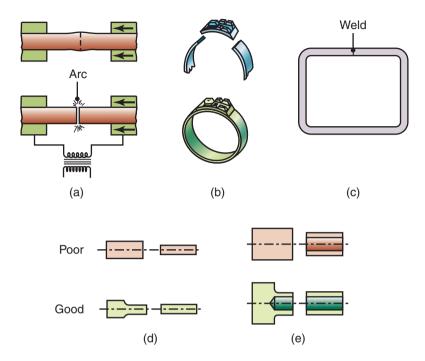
(a) Flash-welding process for end-to-end welding of solid rods or tubular parts. (b) and (c) Typical parts made by flash welding. (d) and (e) Some design guidelines for flash welding.
